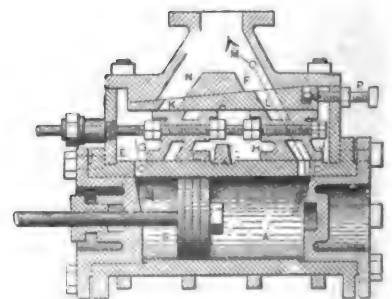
“PRESSURE-PLATE” SLIDE-PISTON VALVE.
